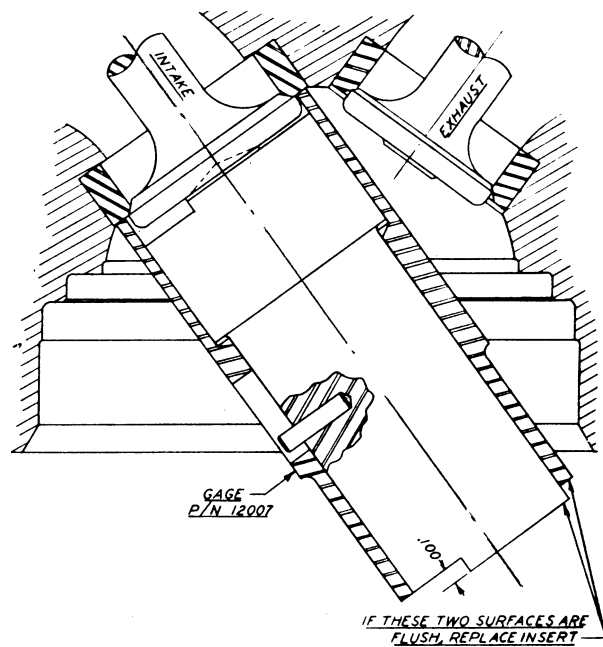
METHOD FOR CHECKING INTAKE VALVE SEATING LIMITS
